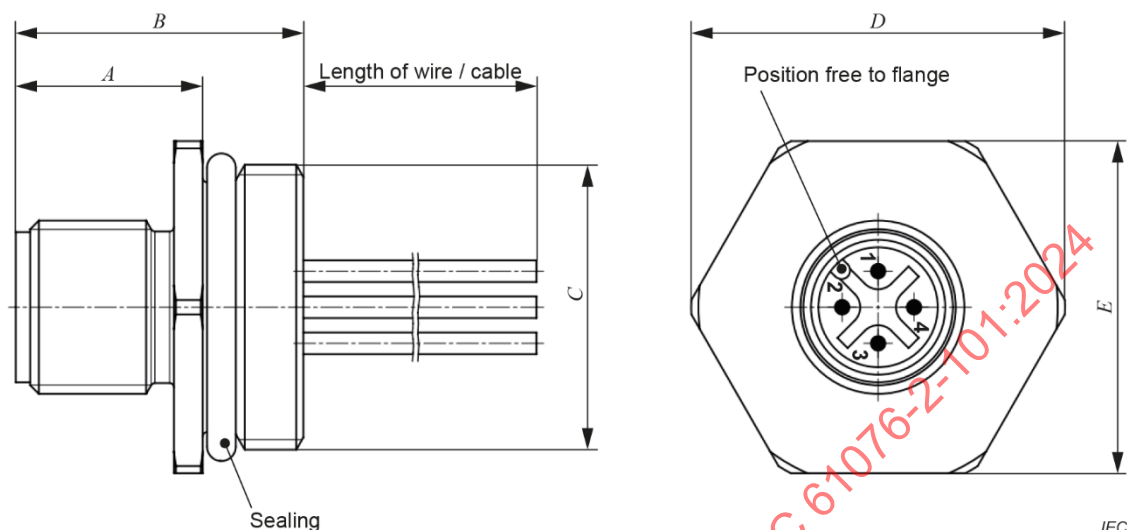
Fixed connector, male contacts, with wire / cable, single hole mounting thread M20 × 1,5
